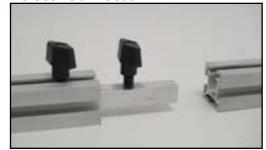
Detail A: Most horizontal extrusion connections have a patented expandable lock. This lock inserts into the groove of an opposing extrusion. Tightening the lock with the Hex Key Tool expands the lock and creates a strong positive connection.
